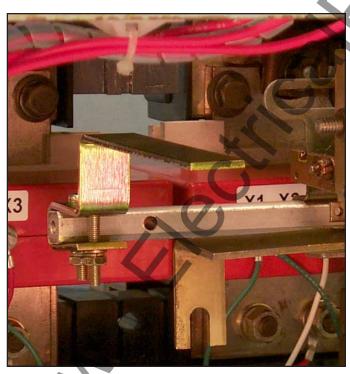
Trip Finger Installed on a Long Trip Shaft.
